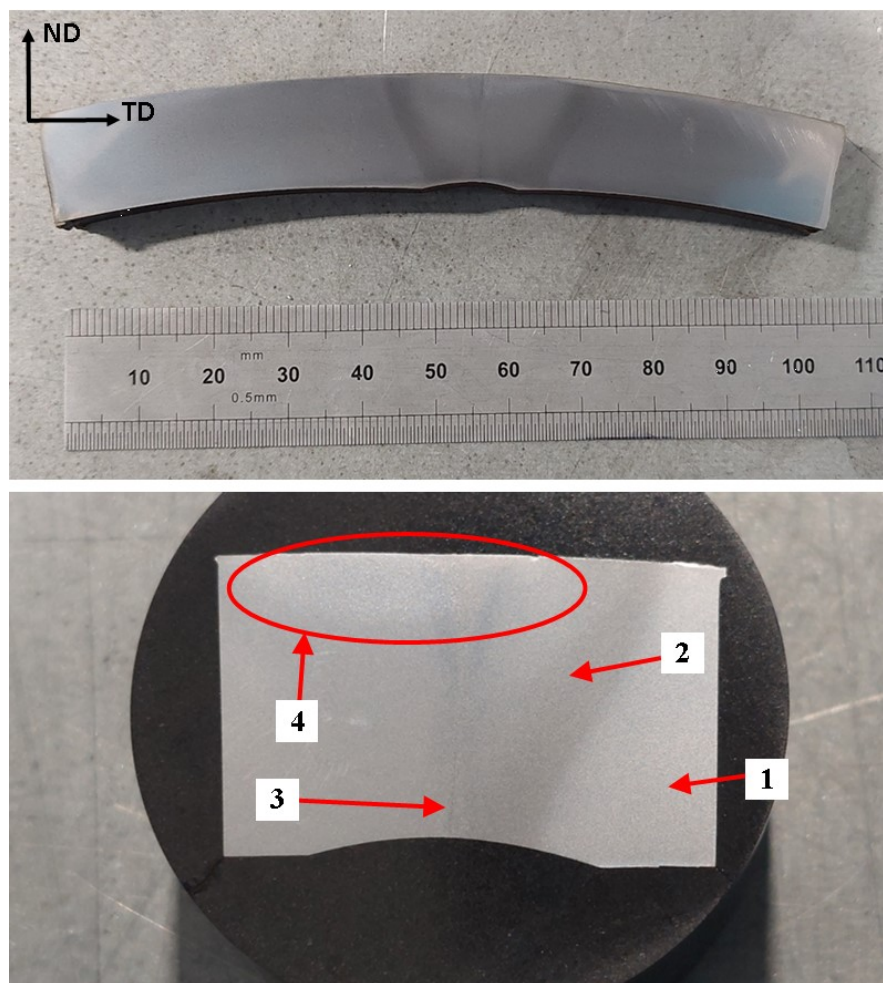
Zones of 16 mm thick heat treated X60 HFI welded pipe weld. Base metal (1), affected zone (2), weld line (3) and thumbnail (4).
